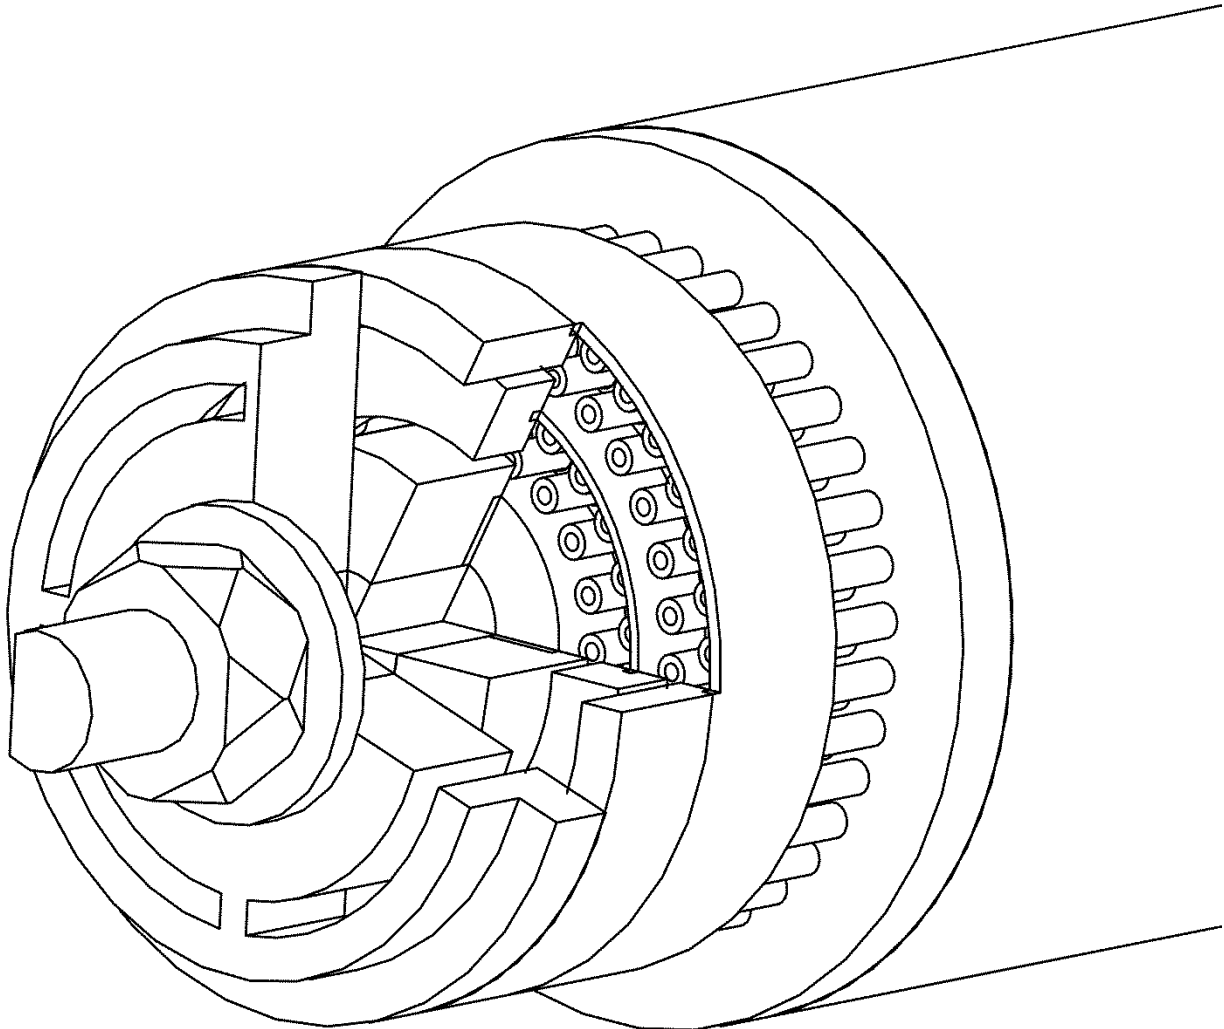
3D view of the tube flow distributor. Part of the shell side distributor is visible behind the tube side distributor.
